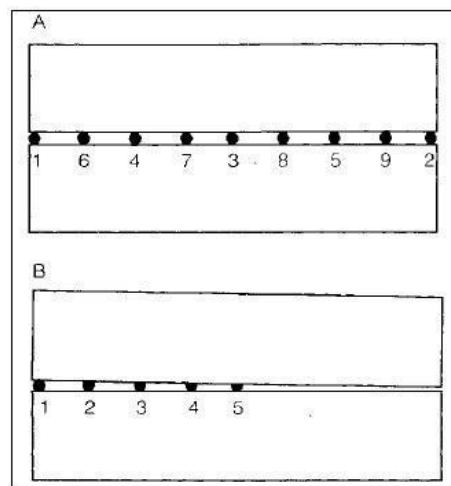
Tack welds sequence. The correct tack weld sequence is shown in A above.
